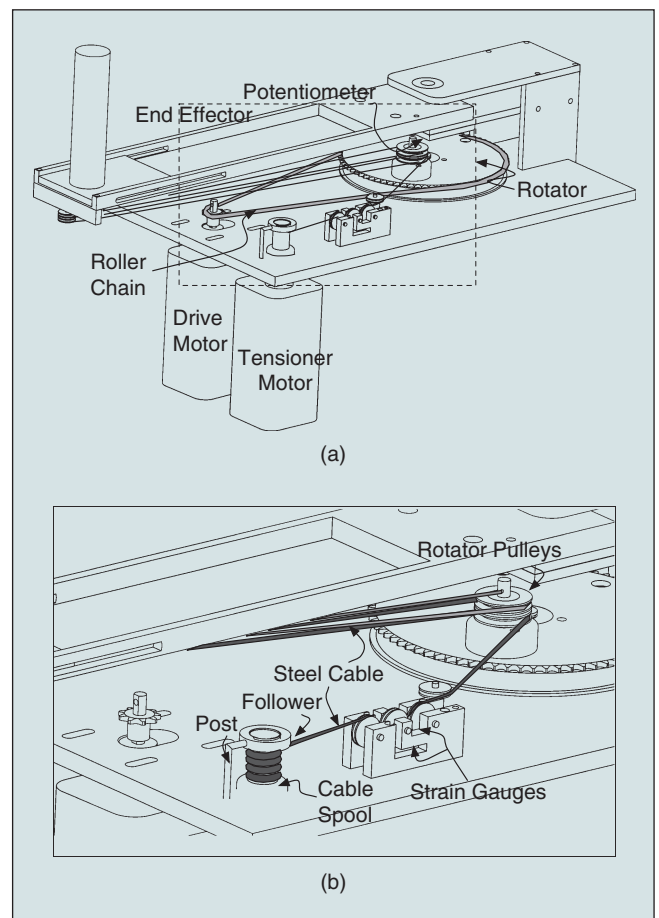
(a) Proof-of-concept drawing shows the basic elements of the MARIONET. (b) A detailed view of the cable routing and tension measurement system. Note that the cable between the rotator and end effector is organized in a block and tackle.
